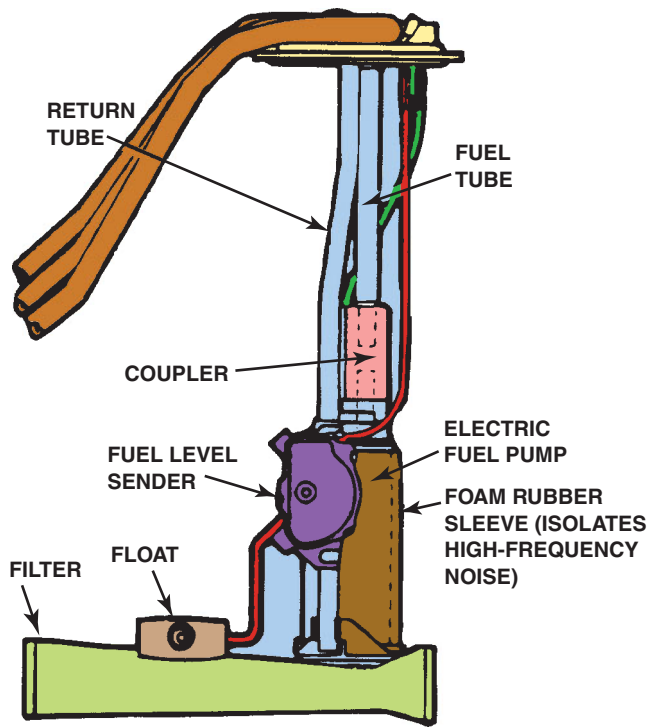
The fuel pickup tube is part of the fuel sender and pump assembly.
